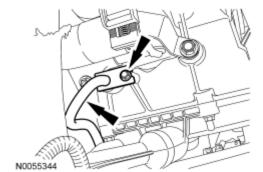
Locating RH Front Halfshaft Nut Courtesy of FORD MOTOR CO.
